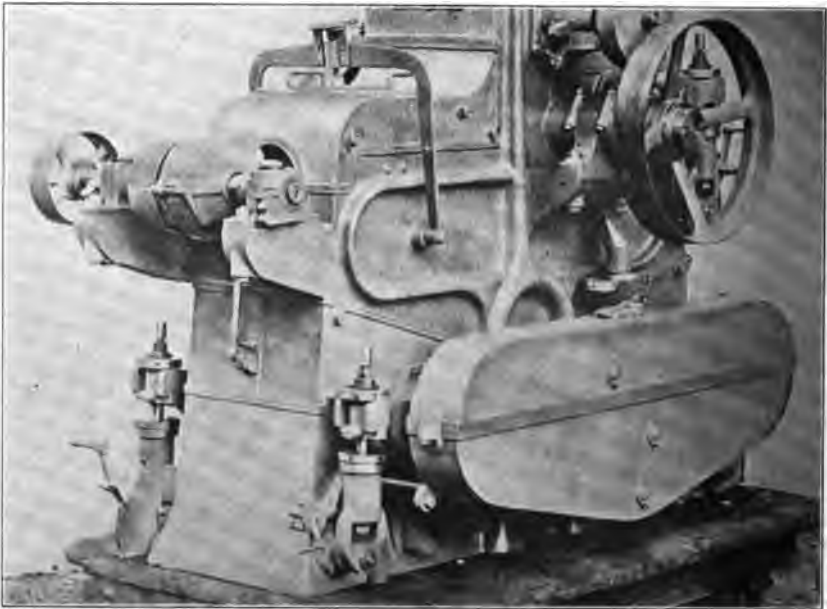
Same gears suitably and properly guarded, the guard being so designed that it can be removed if desired.
